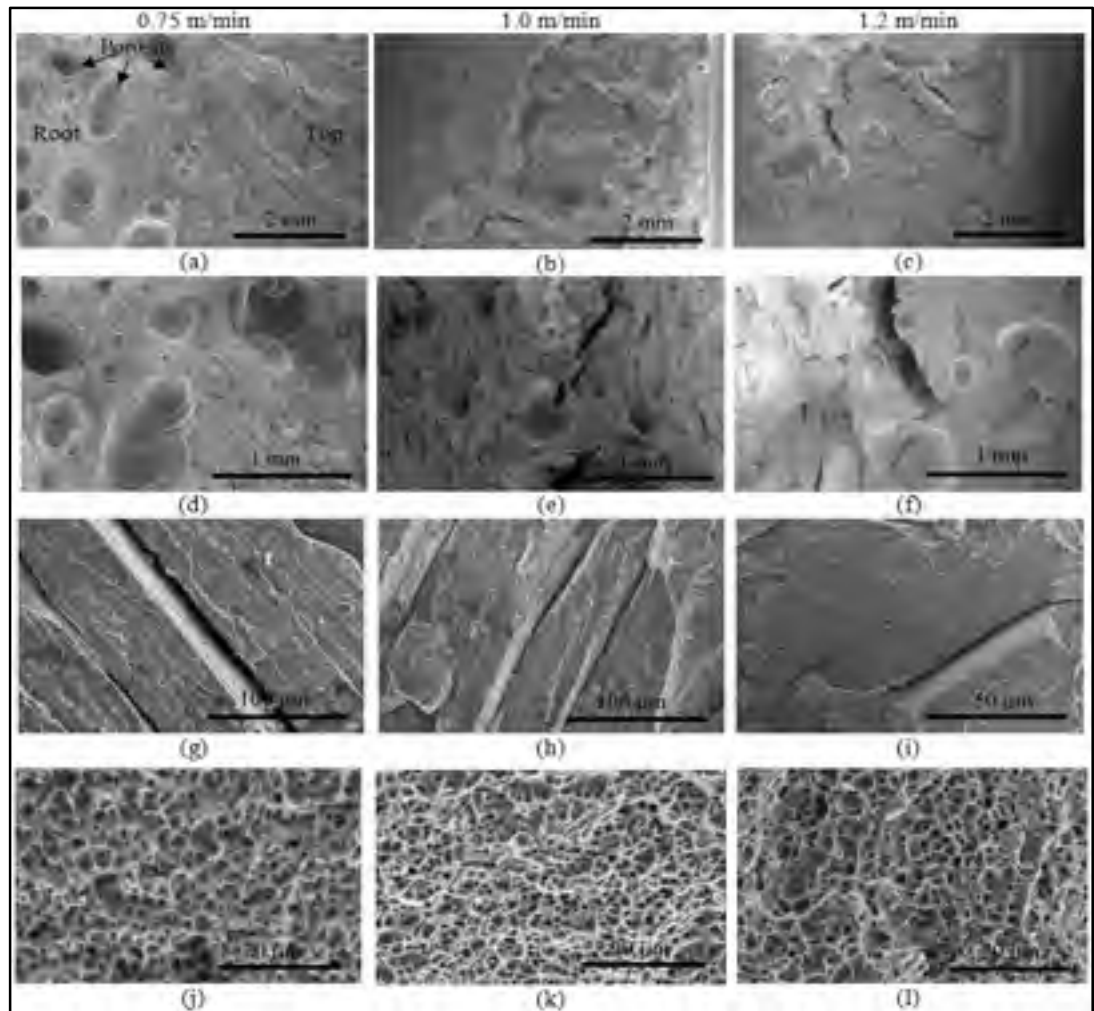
Secondary electron imaging of the Charpy impact fracture surfaces for the welds assembled at welding speeds of 0.75 m/min (a,d,g,j), 1.0 m/min (b,e,h,k) and 1.2 m/min (c,f,i,l)
